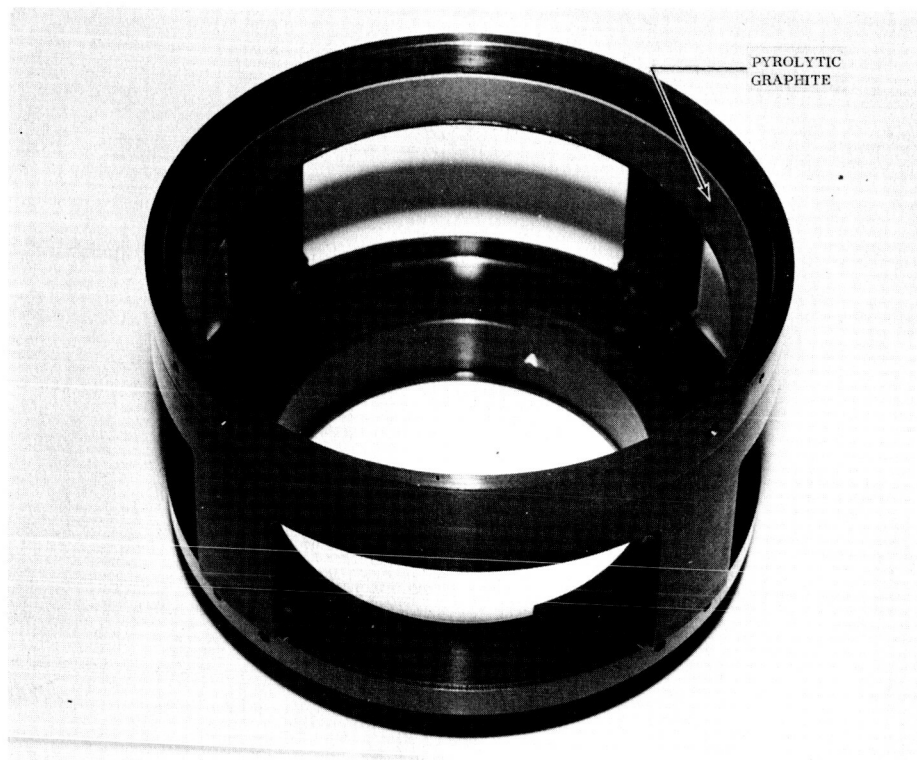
Lower Half of Eddy-Current Rotor, CPD Engineering Unit 1
